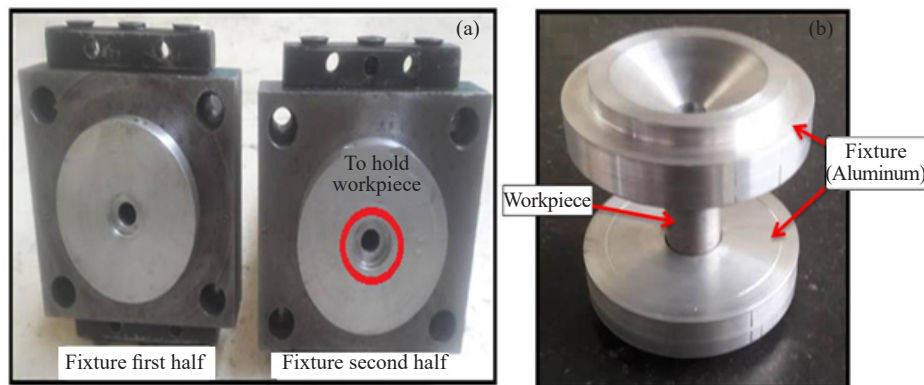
(a) Workpiece fixture, (b) Fixture holds the workpiece
